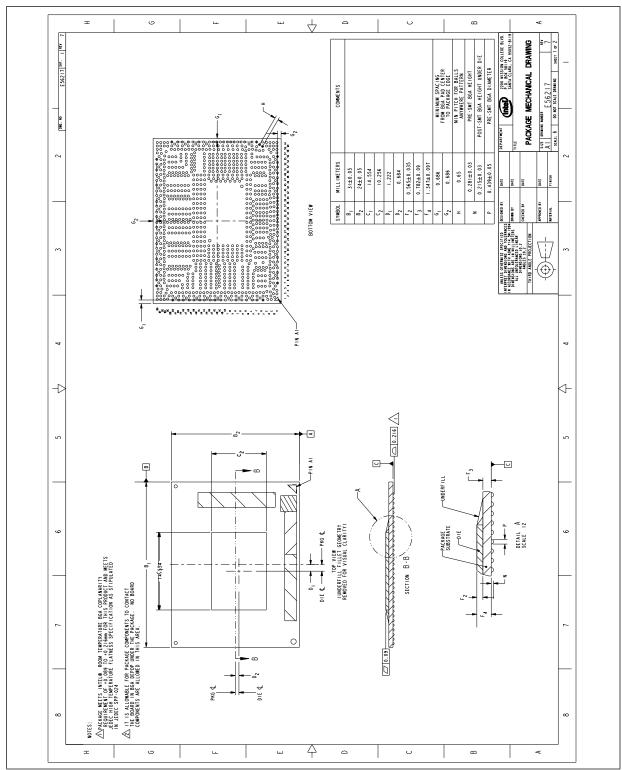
Processor BGA1023 2C (GT2) Mechanical Package (Sheet 2 of 2)
